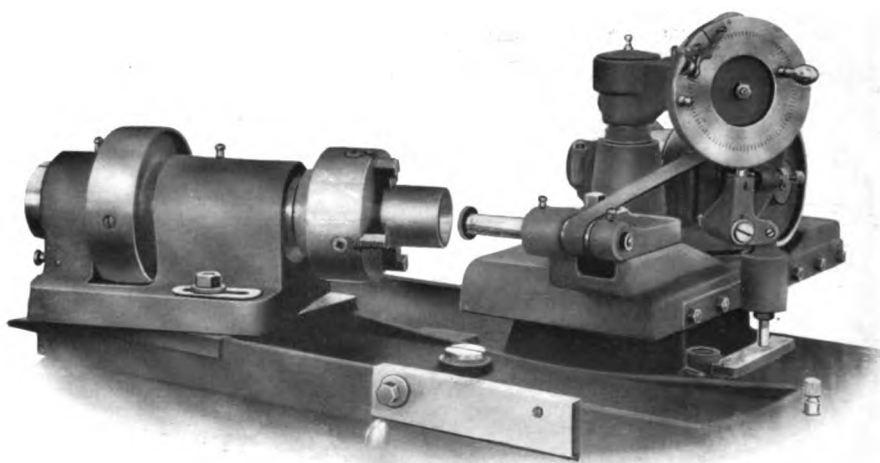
Crank Grinder Adjustable Work Carrying Heads
